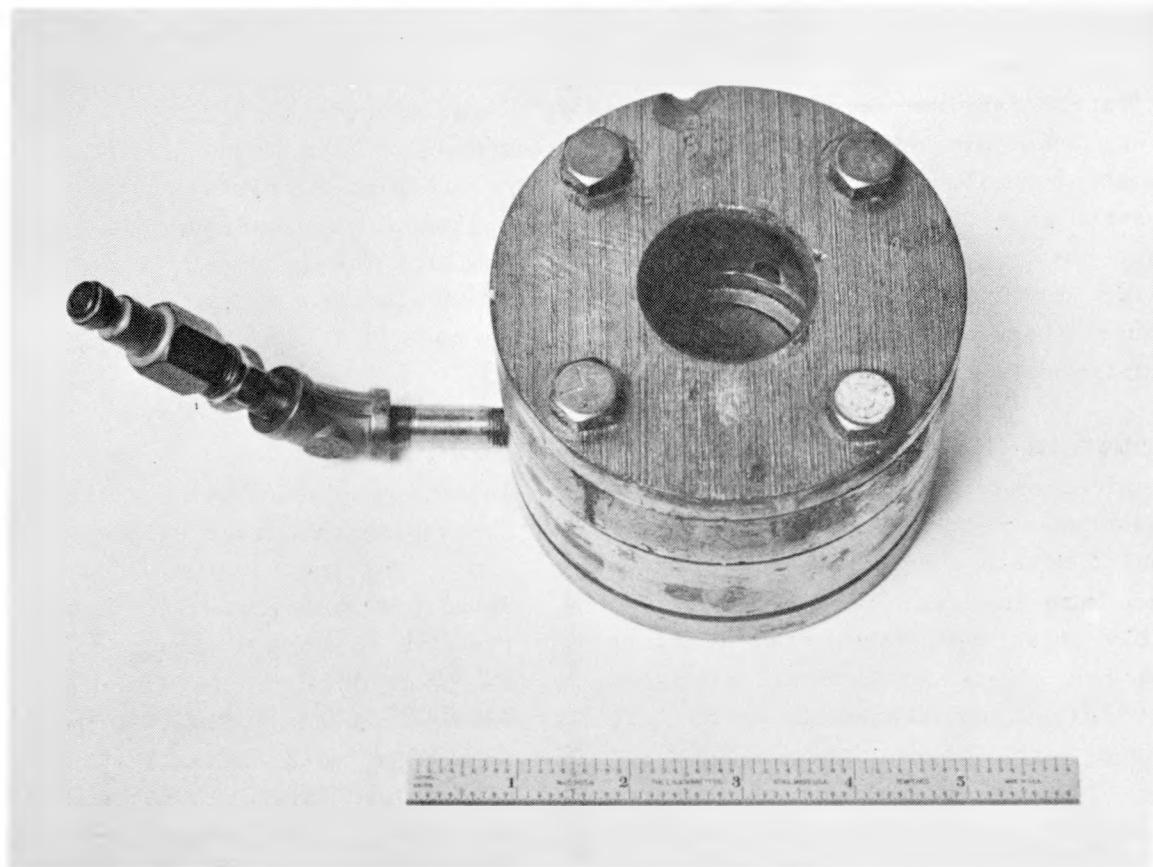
Presently used mold consists of graphite and metal pieces.
